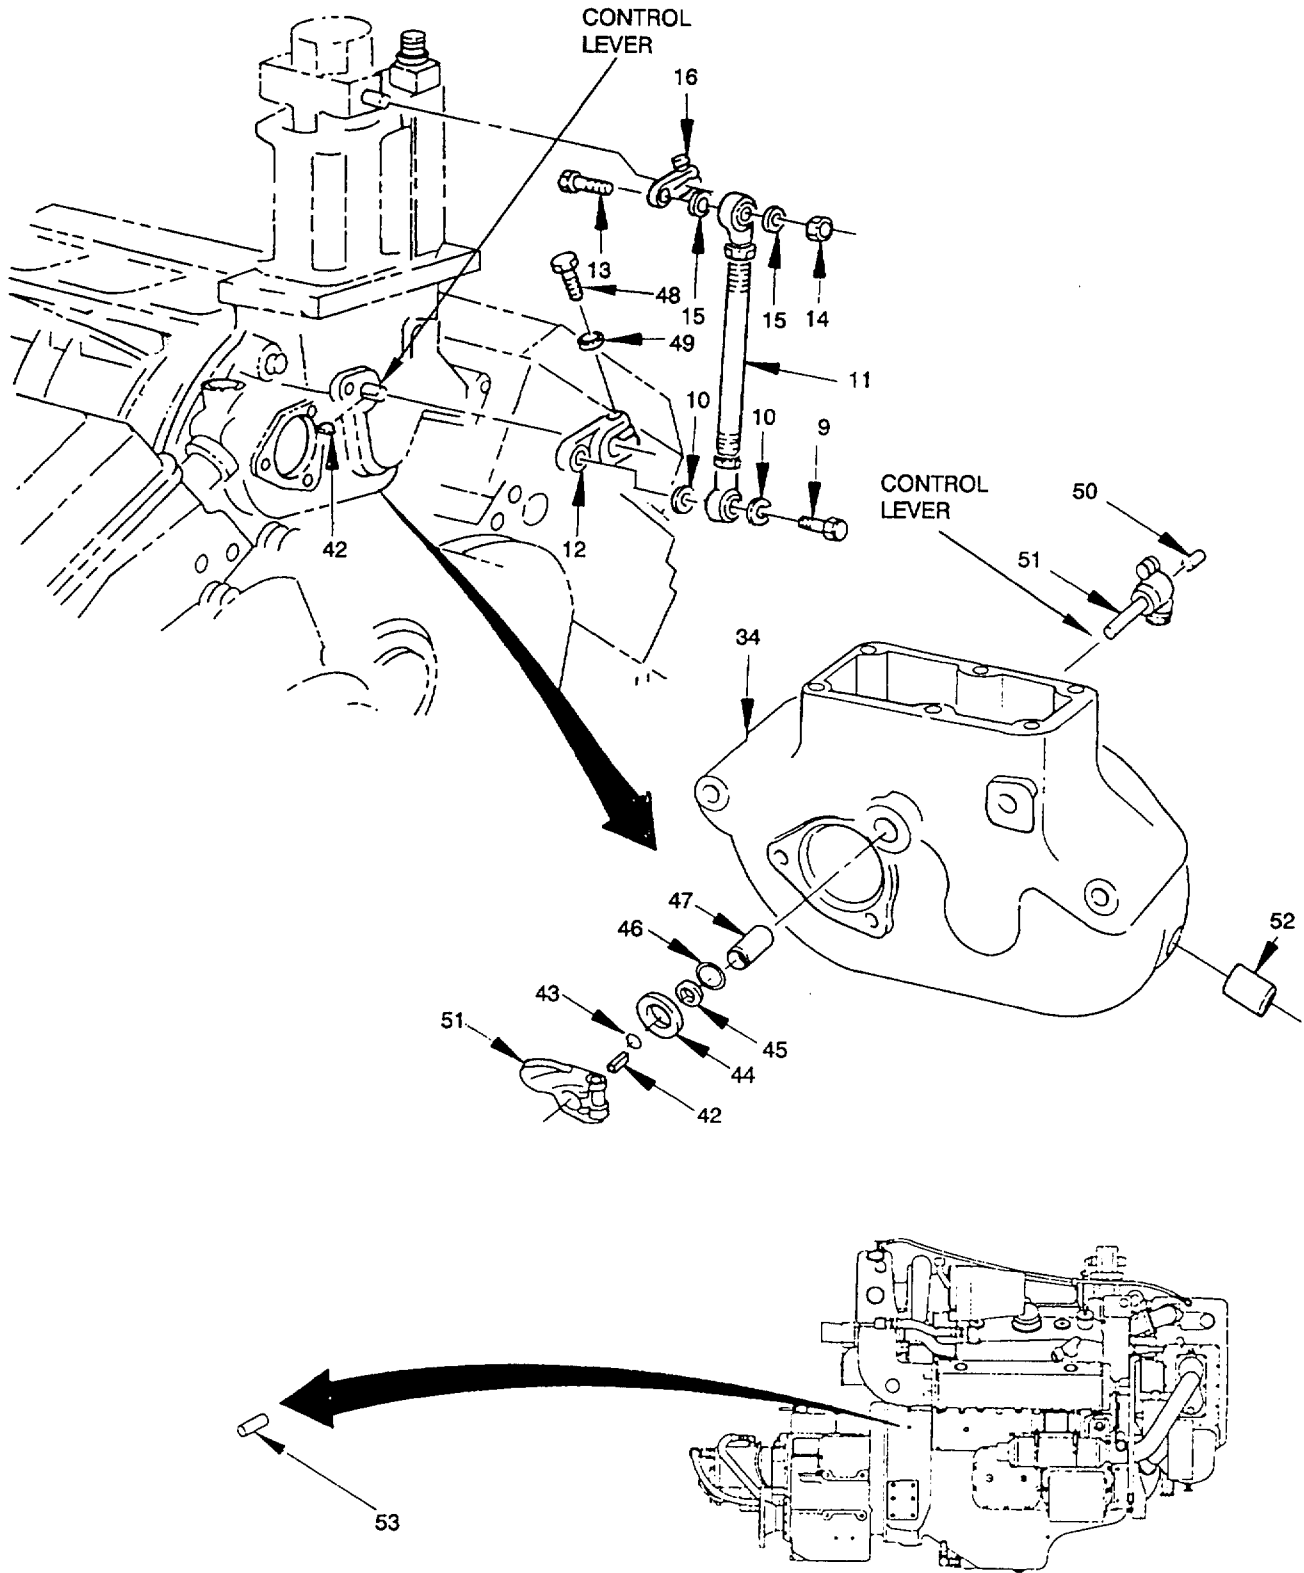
Electronic Governor Controller, Engine Junction Box Assembly "A4", Remove/Install (Sheet 3 of 3).
